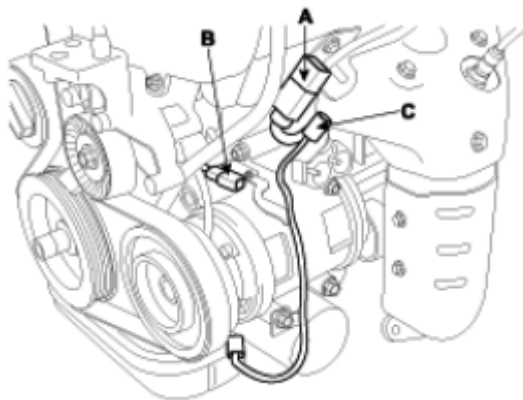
Identifying Oxygen Sensor (Front 1st), Air Conditioner Compressor Switch And Oil Pressure Sensor Connector
